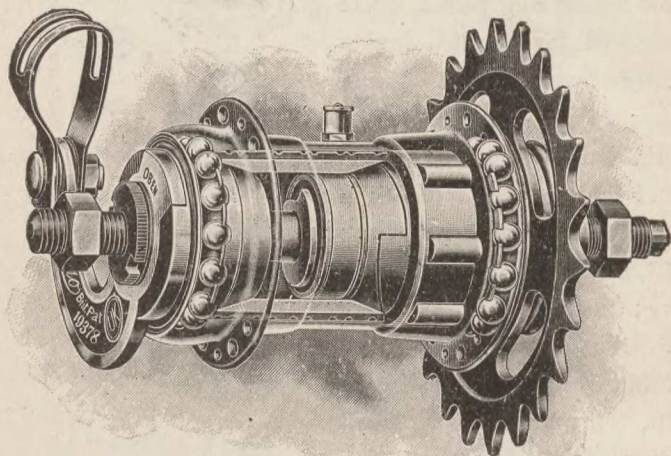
“Cut-away” View of “Torpedo” Coaster Hub
